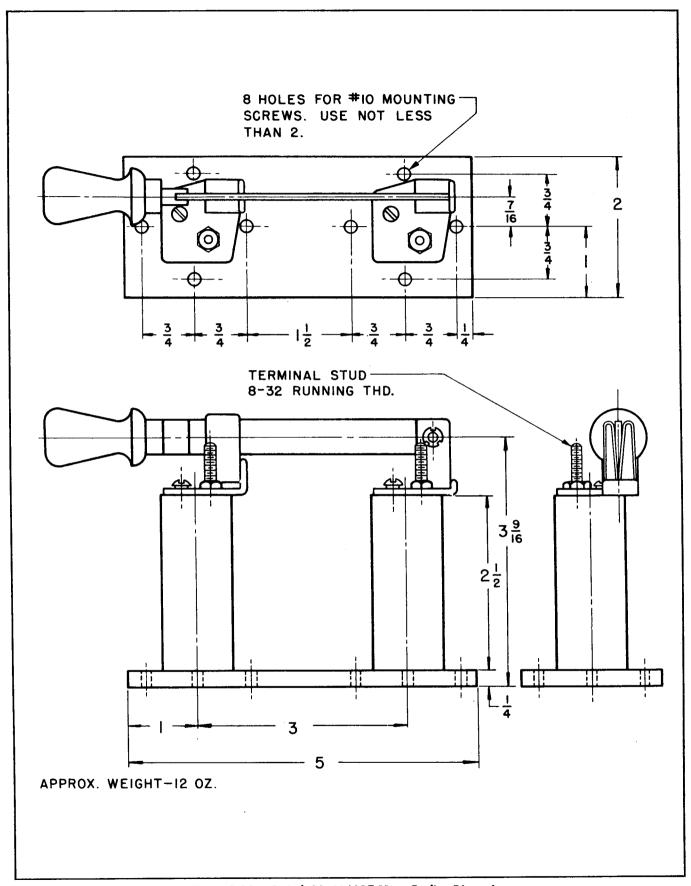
Switch SA-46/ART-13 — Outline Dimensions
